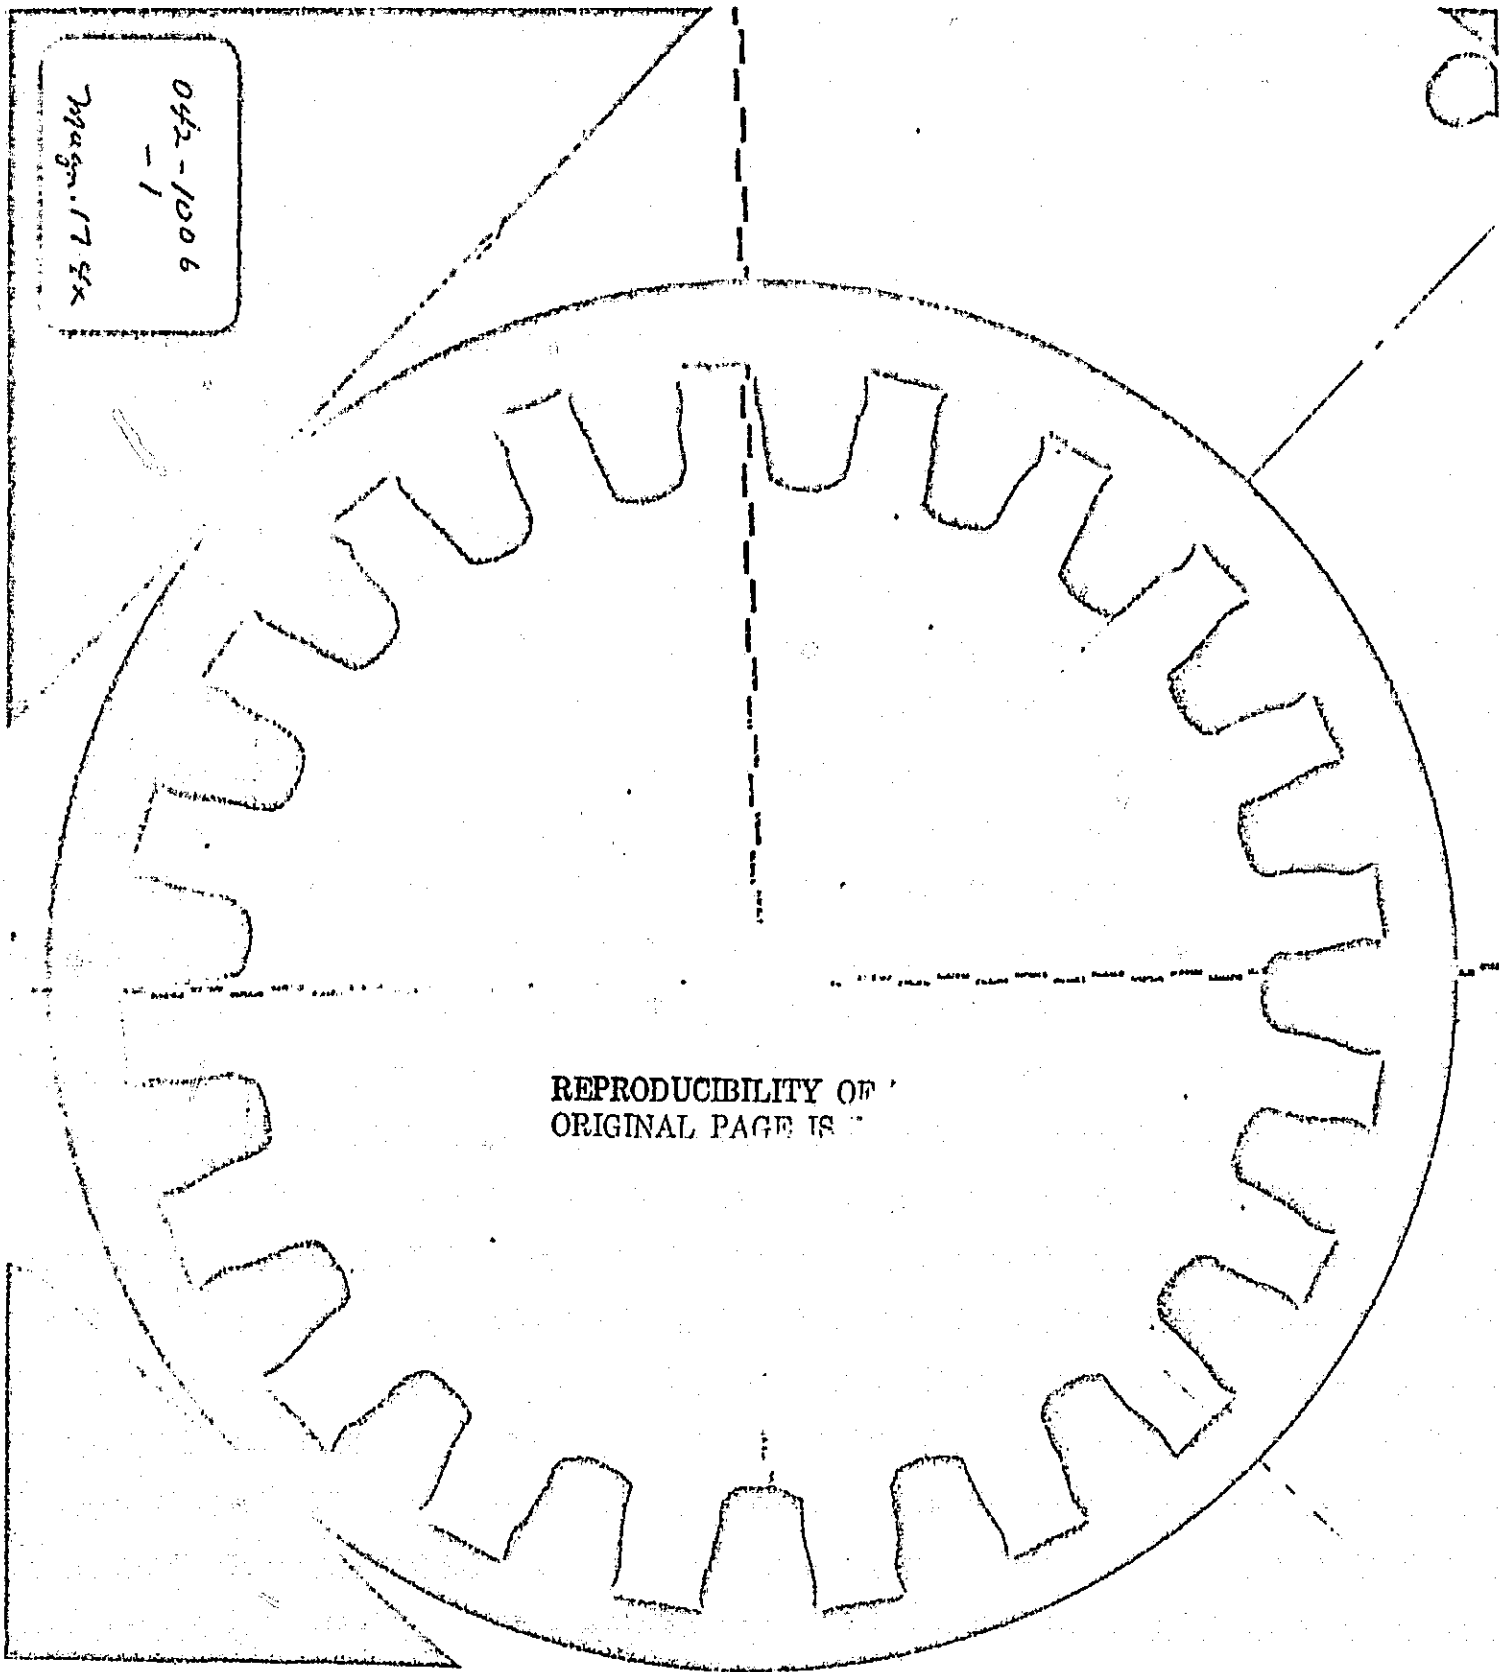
Enlarged cross-section of stainless steel axially grooved tubing
